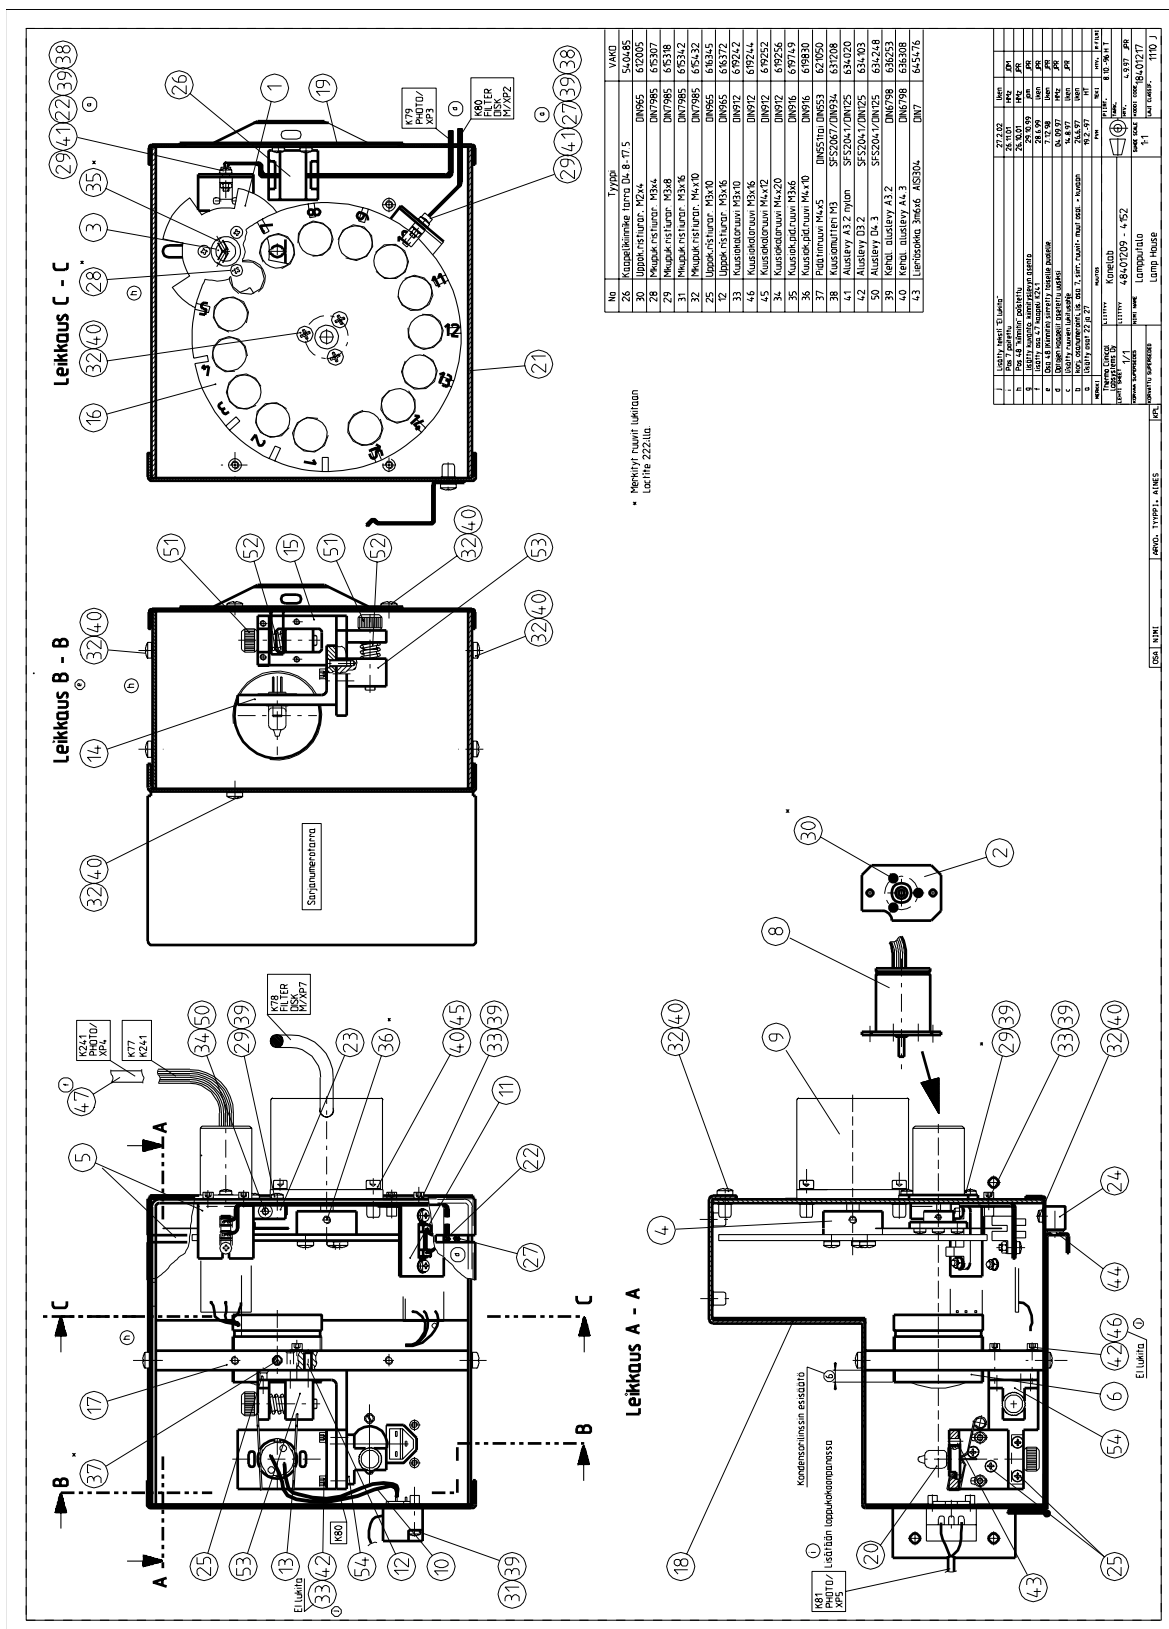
Konelab 60 & 30 & 20: Lamp house 840120
